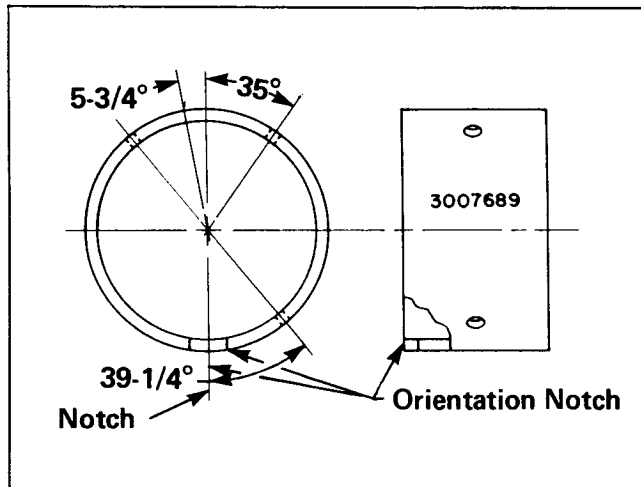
, (N101115). Camshaft bushing orientation notch
